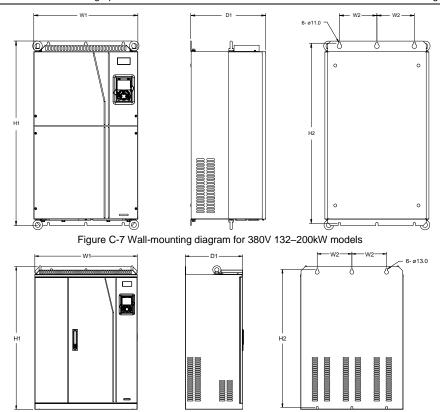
Wall-mounting diagram for 380V 220–315kW models Table C-1 Wall-mounting dimensions of 380V VFD models (unit: mm)
